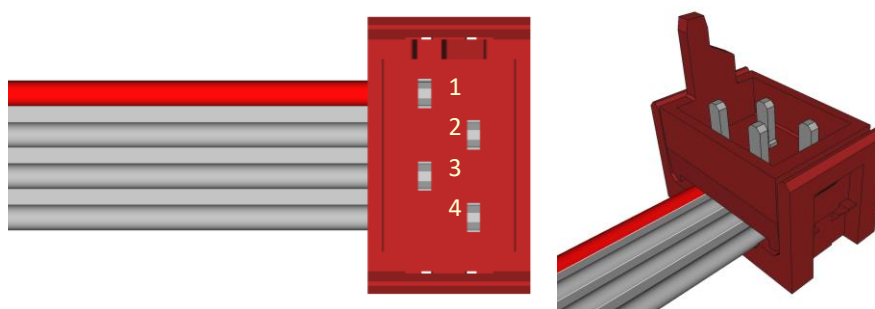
4 Pin Connector for 10/100 Ethernet (Red Wire Indicates Pin 1)
